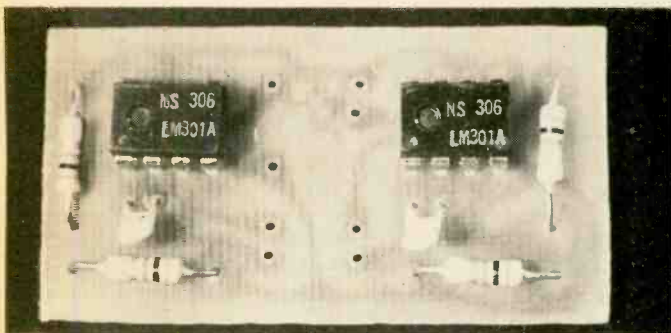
The completed PC board is connected by means of wire links from the remaining holes to the LM381 socket on the preamplifier board.
